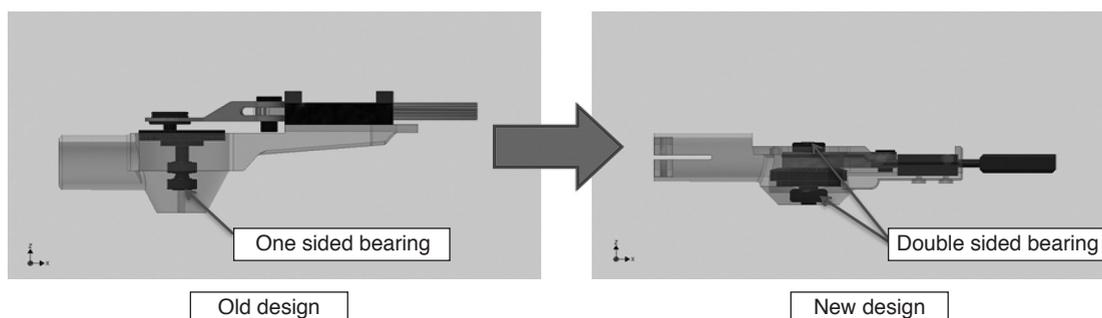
Previous version's design with one sided bearing (left) and new design with double-sided bearing (right).
